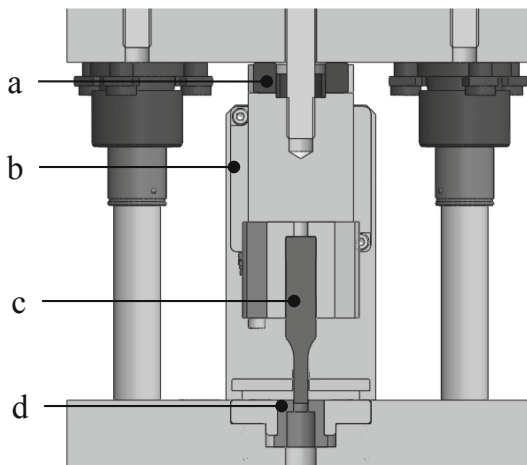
Setup of the stamping tool: (a) force measuring ring Kistler 9051A, (b) Keyence laser sensor LK-H027, (c) stamp, (d) die
